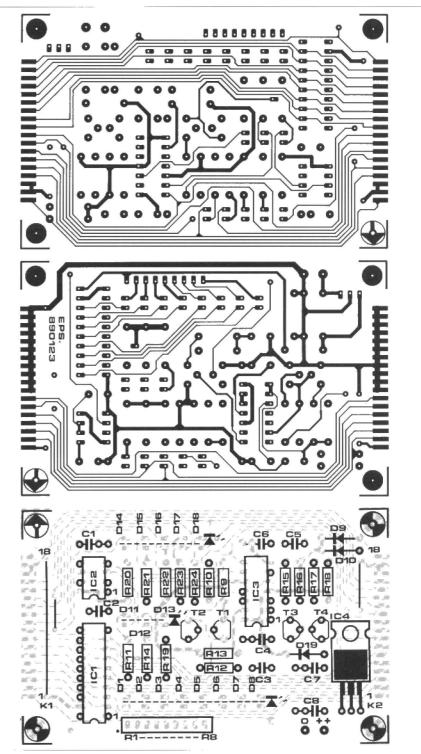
Track layout and component mounting plan. A number of parts must be soldered at both sides of the printed-circuit board.
